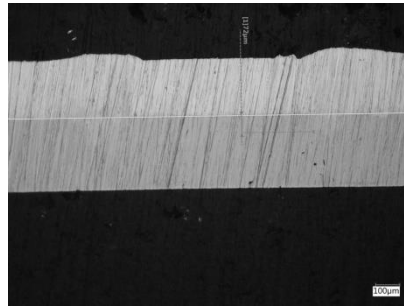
Cross section of a wobble laser weld performed 250 $\mu$ m thick copper and a 18650 cell in an overlap joint configuration.  $F_m=666$ Hz;  $A_m=250\mu$ m;  $v_s=83$ mm/s;  $P_L=360$ W;  $A_w=2,2$ mm<sup>2</sup>. The measured maximum welding depth is 72 $\mu$ m
